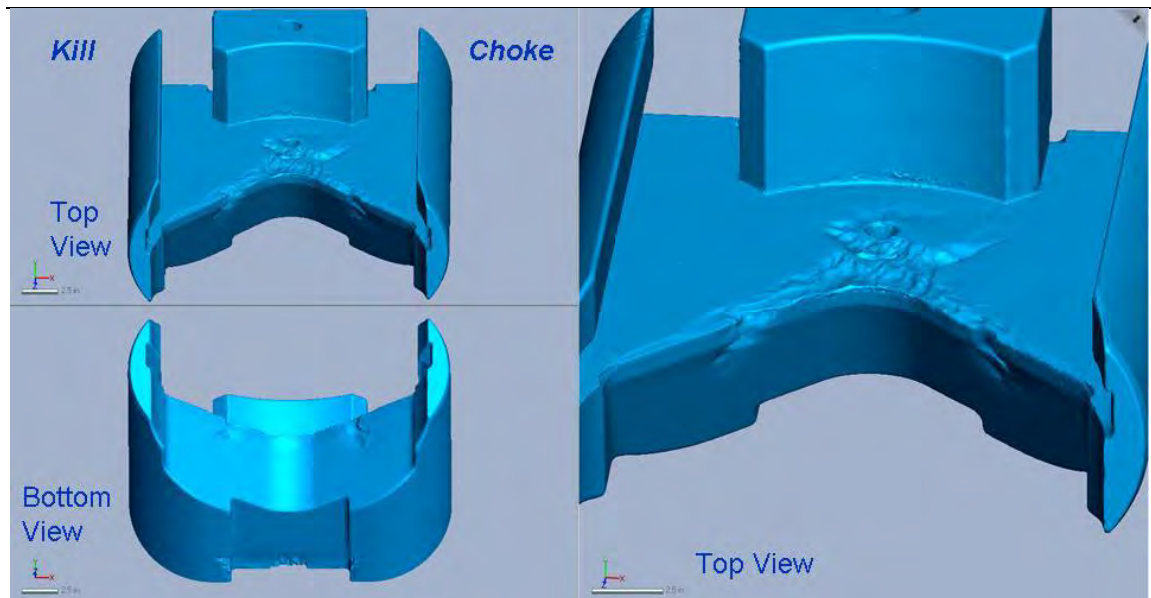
Three-Dimensional Laser Scan of Starboard-Side (Lower) CSR
